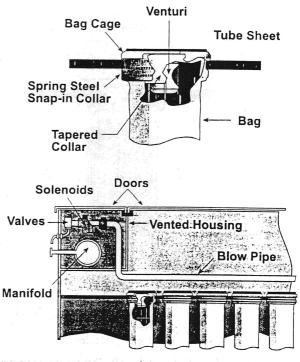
How bags are mounted to cage, sealed to tube sheet, and installed in baghouse.
